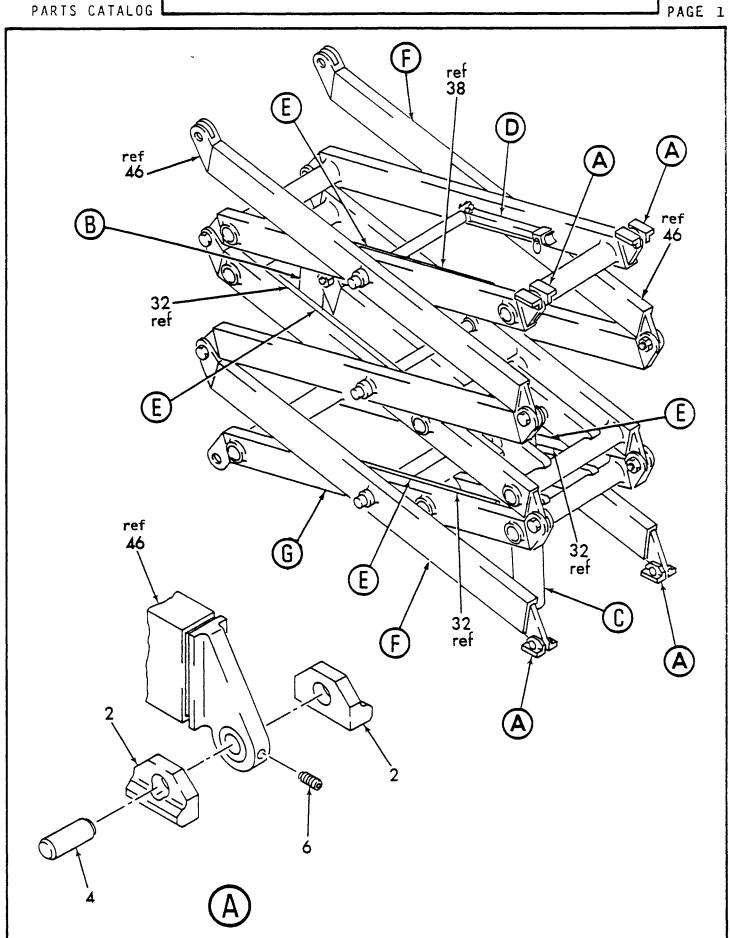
INNER ARM ASSEMBLY (MIDDLE)
